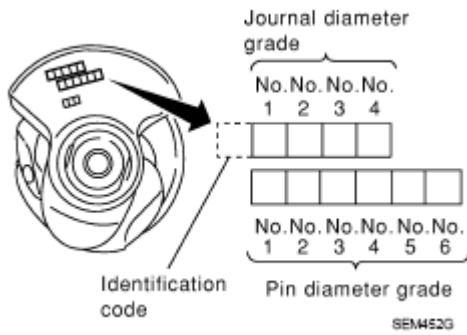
Identifying Pin Diameter Grade ("0", "1" Or "2") On Front Of Crankshaft
